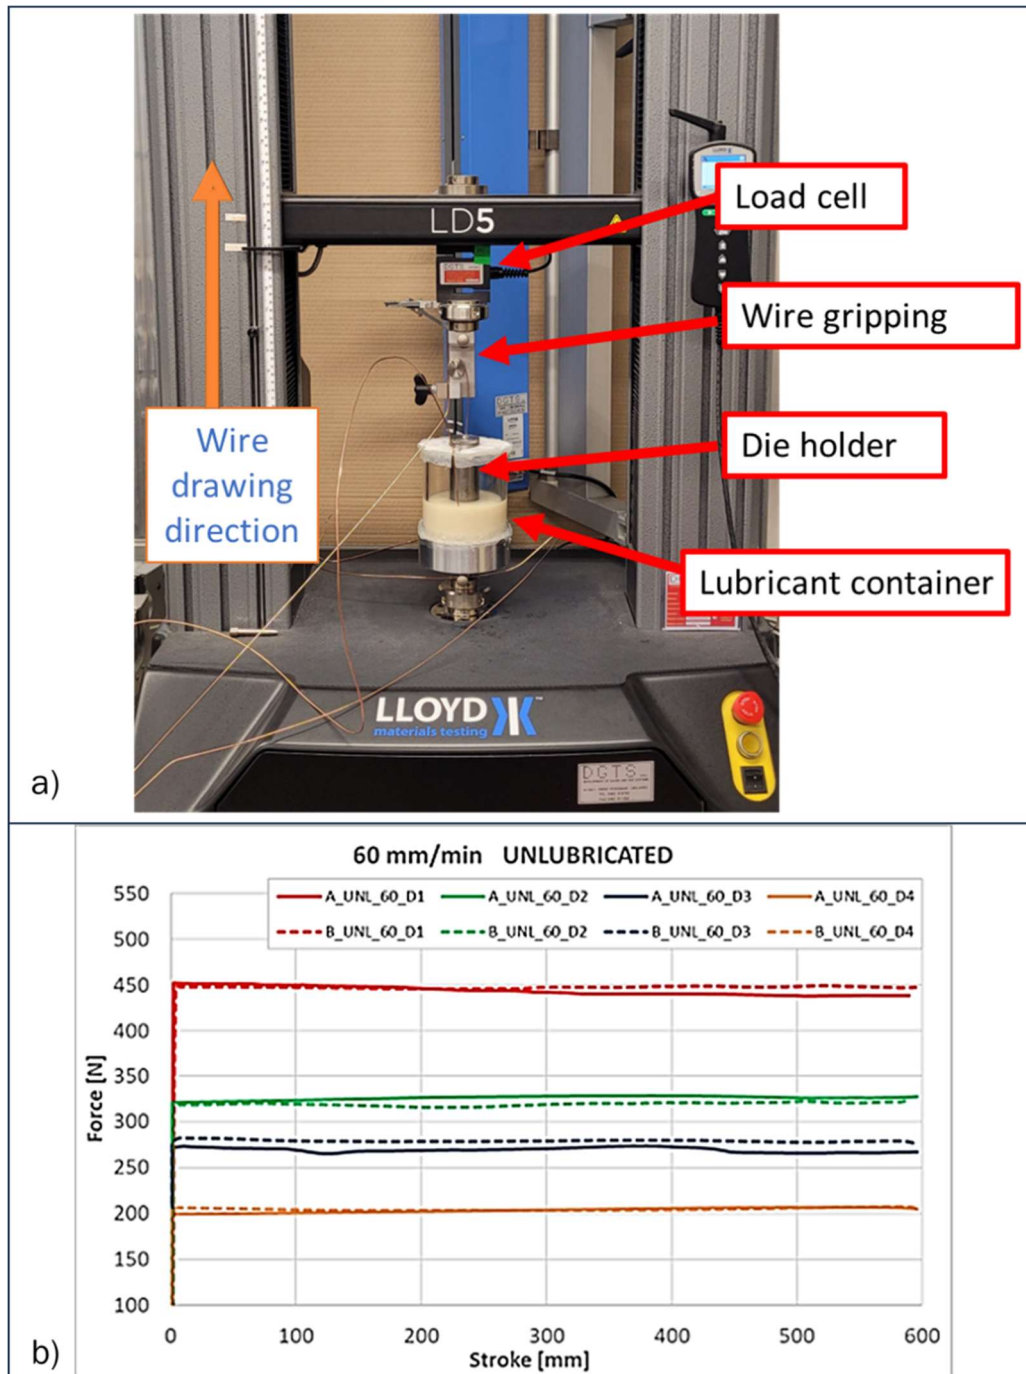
a) Picture of the set-up for the wire drawing tests using the LD5 Lloyd press; b) Wire drawing tests in unlubricated condition conducted at the velocity of 60, two tests are shown for each condition. [81]
